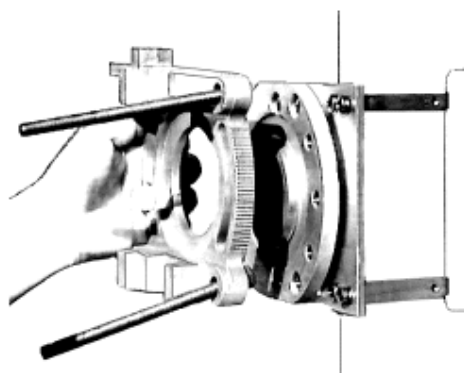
Mini-elevation Plate placed on Elevation Plate
